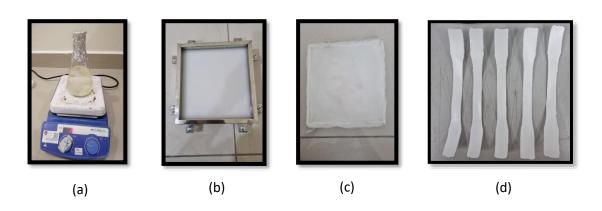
Steps in producing of PLA/FsHA composite. (a) stirring PLA/FsHA in DCM at room temparature, (b) casting in metal plate mould, (c) PLA/FsHA composite sheet and (d) tensile specimen of the composite
